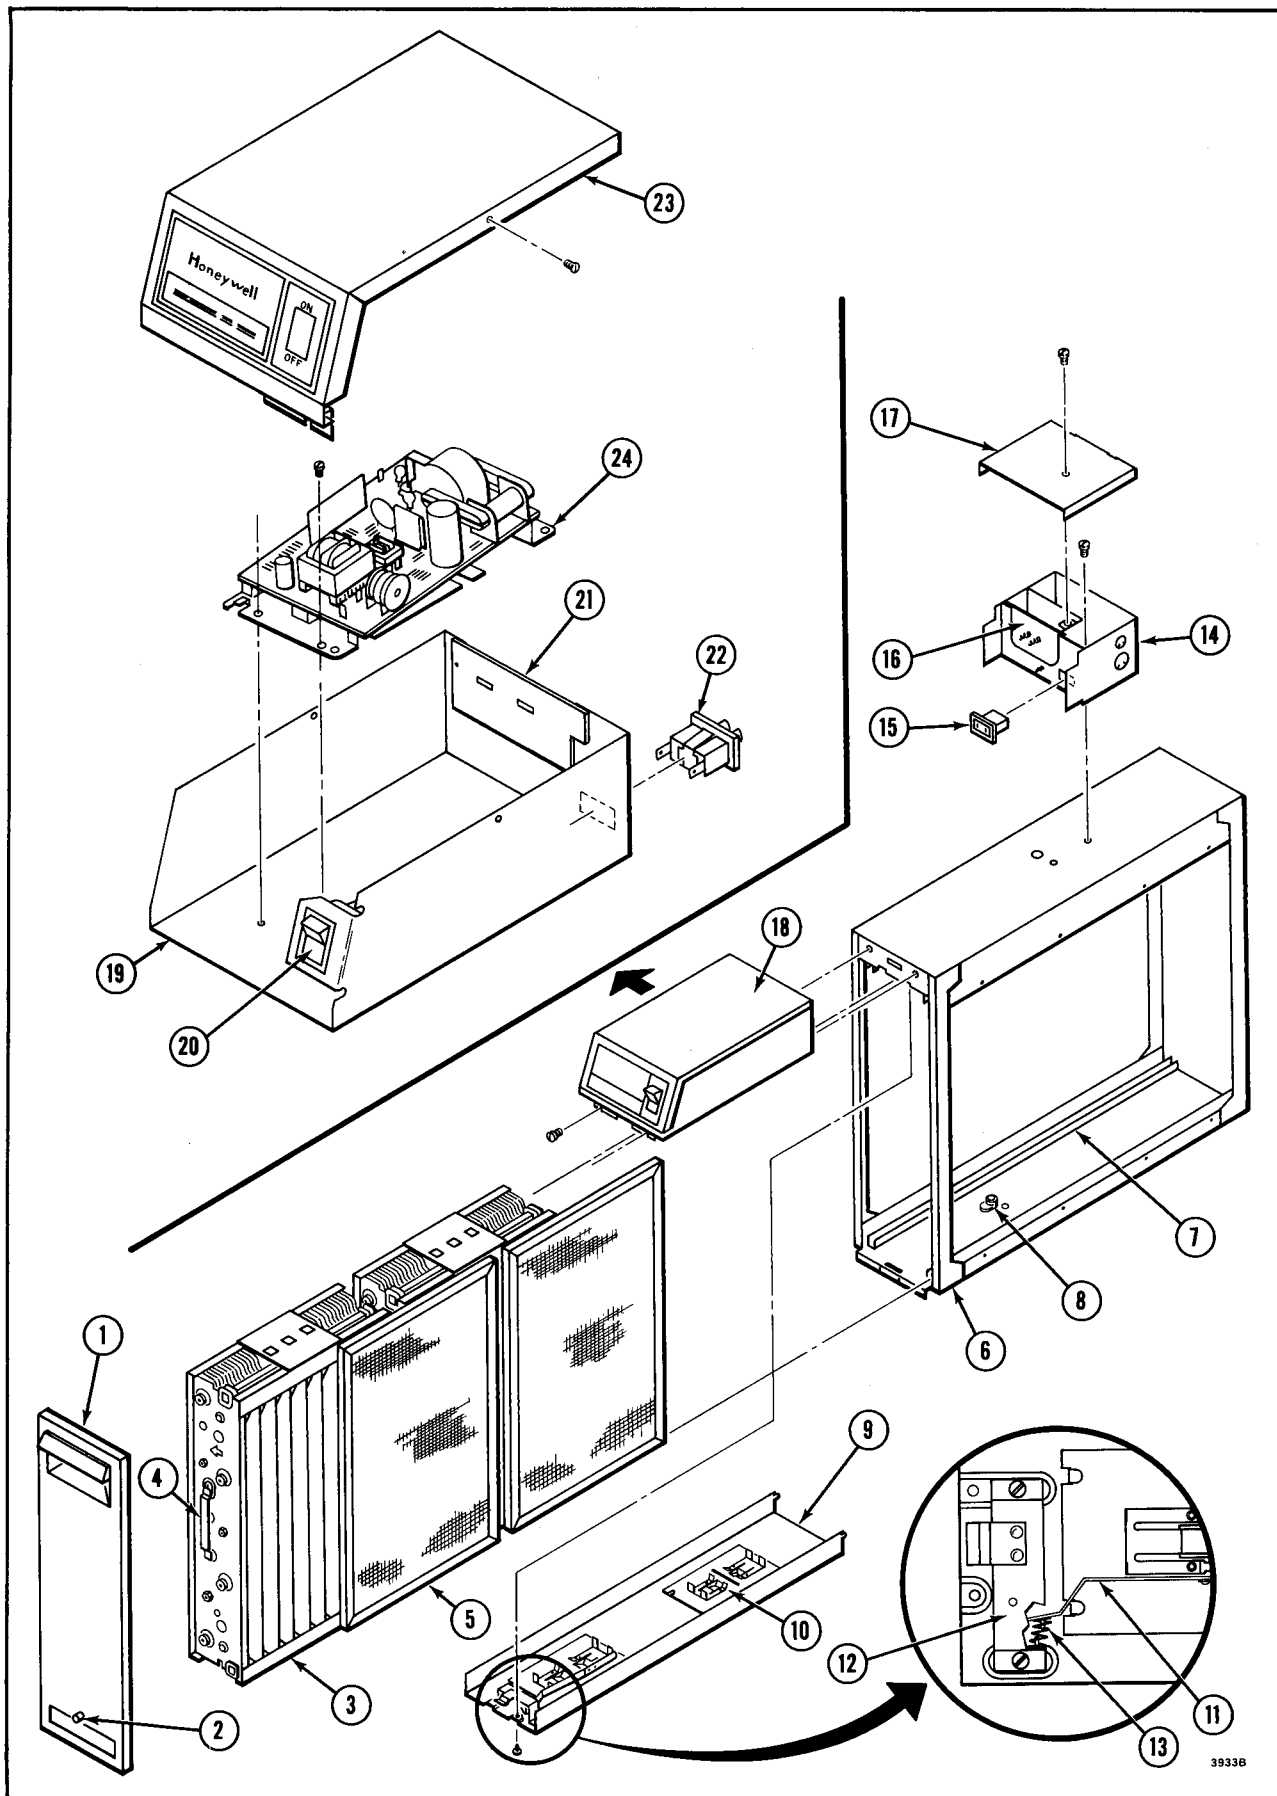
COMPONENTS OF THE F50E ELECTRONIC AIR CLEANER (2-CELL MODEL SHOWN)
